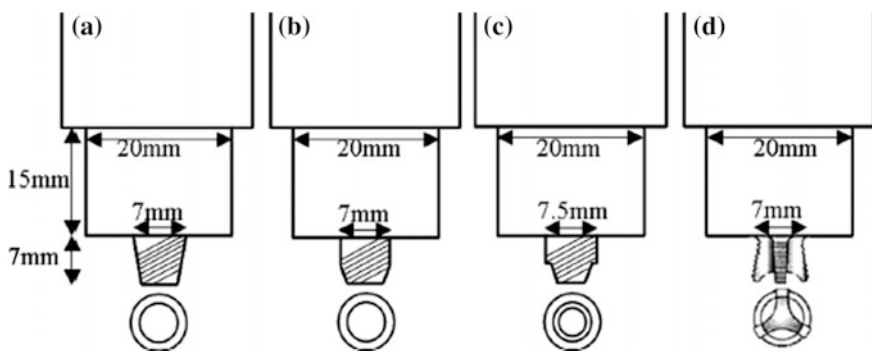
Schematic of pin profiles. a Conical threaded. b Cylindrical-Conical threaded. c Stepped conical thread. d Neutral flared triflute
